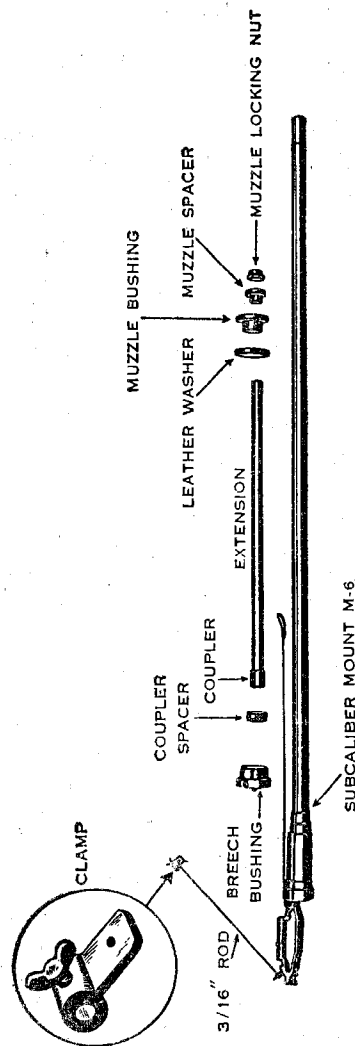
Subcaliber mount and firing attachments for 57-mm gun.
